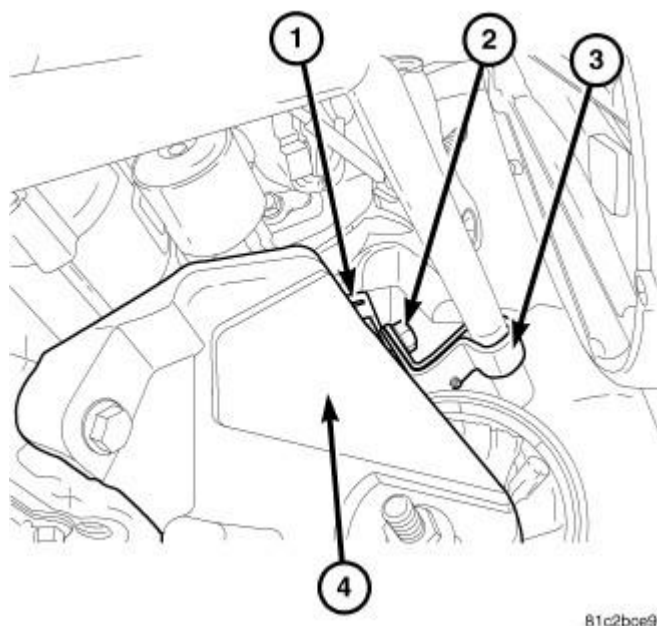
Identifying Heater Tube & Ground Cable Bolt At Front Mount
